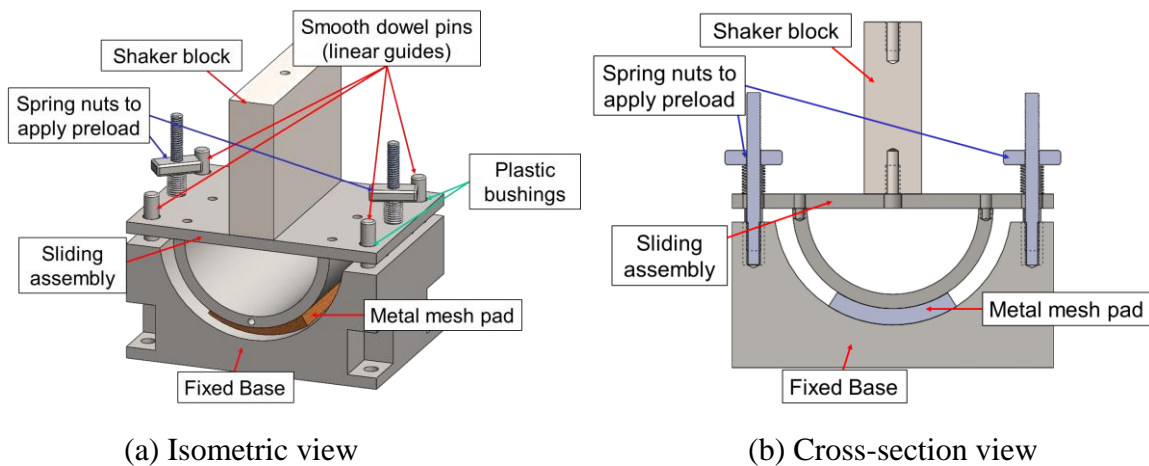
Schematic views of a test rig for loading a formed metal mesh pad.
